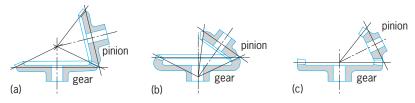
Bevel gears. (a) External. (b) Internal. (c) Crown. (After G. L. Guillet and A. H. Church, Kinematics of Machines, 5th ed., Wiley, 1950)
